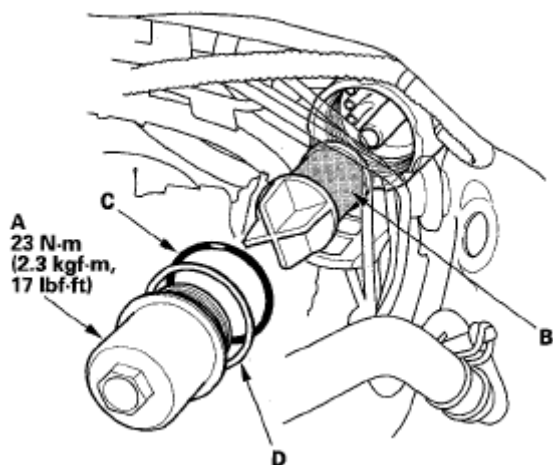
Identifying Fuel Filter B Housing, Element And O-Ring
